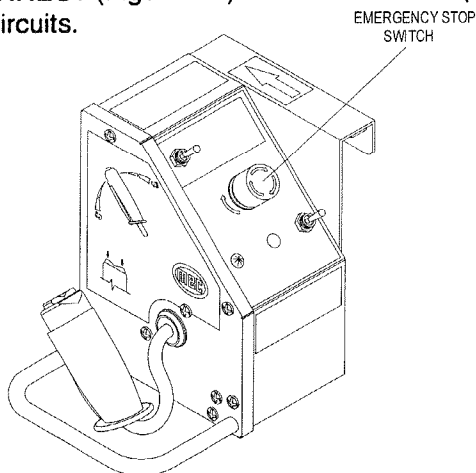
Emergency Stop - Upper Control Box Assembly
